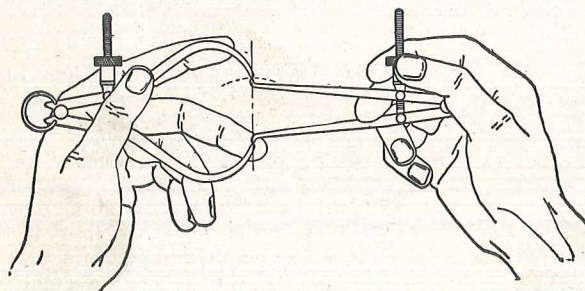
Transferring Measurement from an Outside to an Inside Caliper
